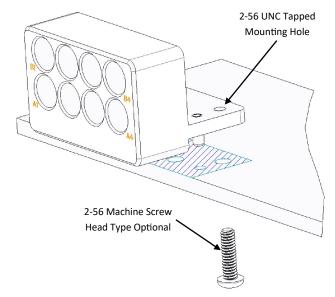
Module with 2-56 UNC tapped hole for mounting hardware.
